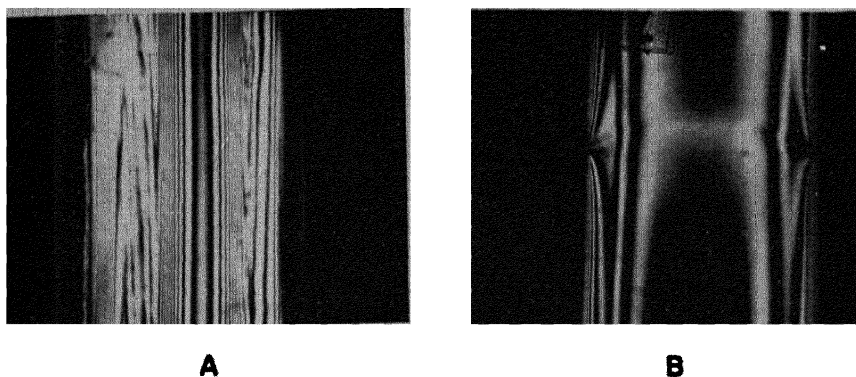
Cross sections of boxes viewed between crossed polaroids: (a) near weld; (b) at weld with line of sight parallel to box wall planes, perpendicular to polymer flow.
